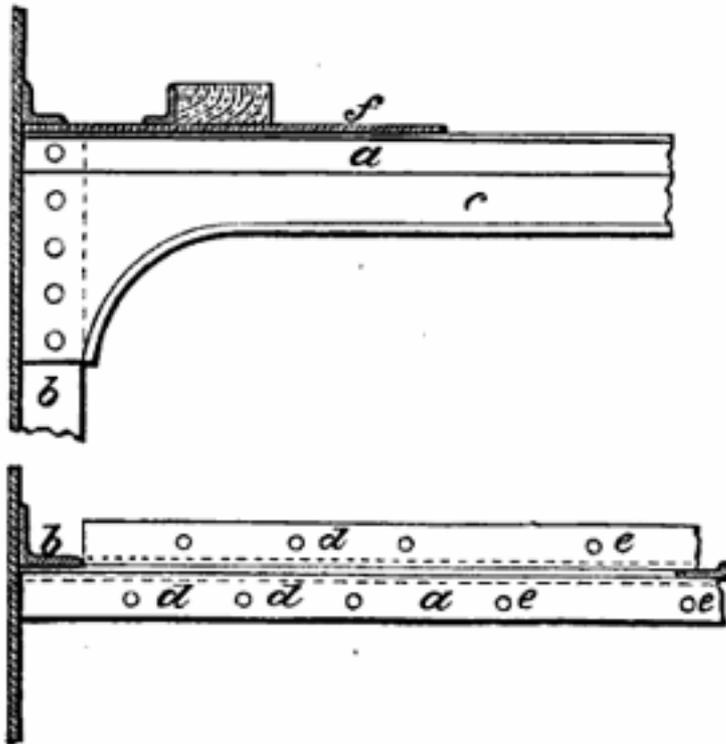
a. Reverse Bar on Beam. b. Frame. c. Beam. d. Rivets for Stringer-plate, 6" or 7" apart.. e e. Ditto for Deck-plank twice the width of plank. f. Stringer-plate.
